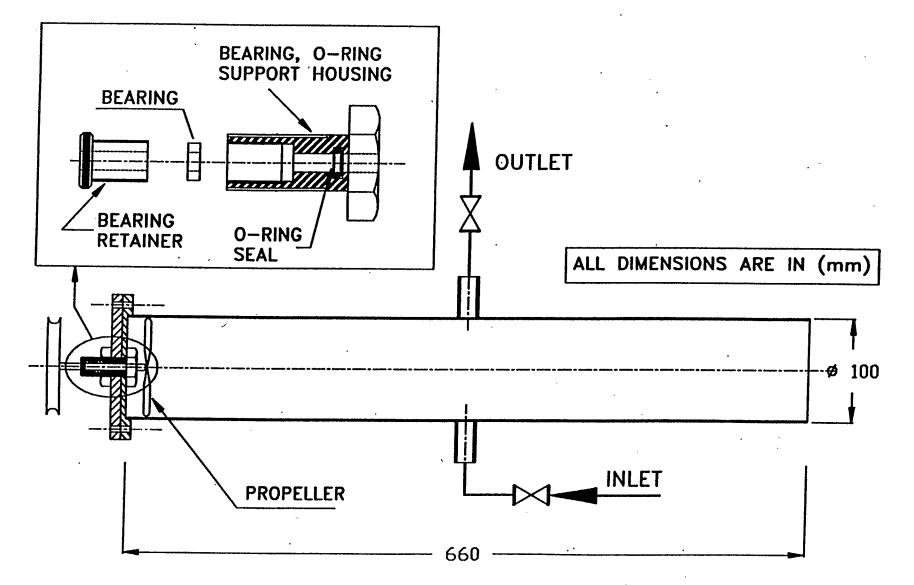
Cross-Section of the Mixing Chamber
